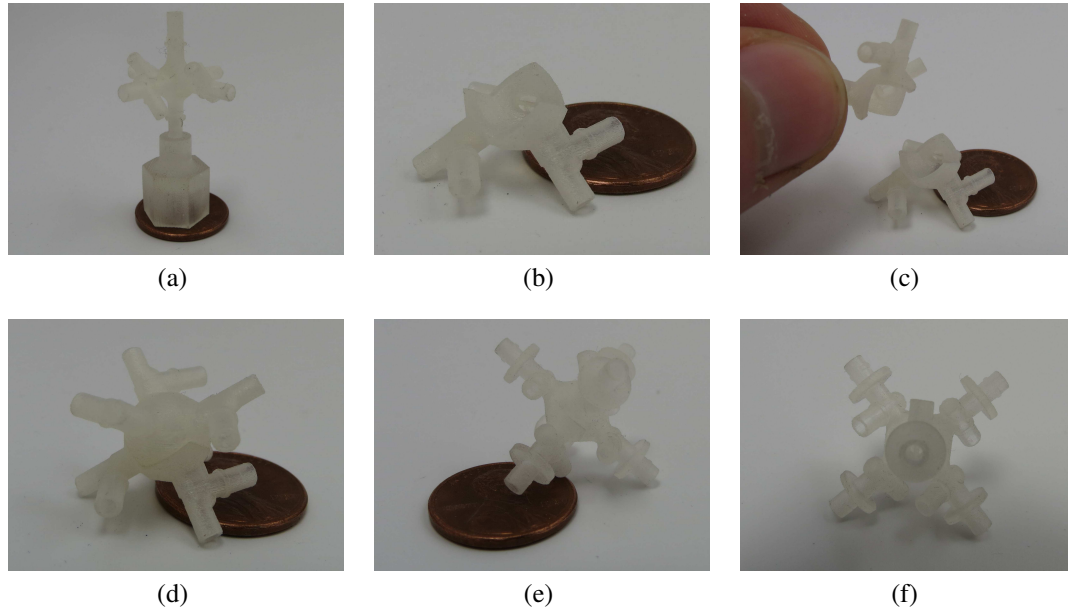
Photographs of selected internal flow channel designs for the stochastic fluidic assembly module with solenoid valves.
